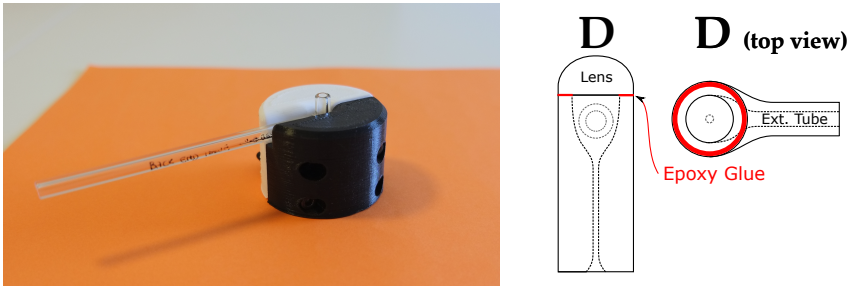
The clamping is provided by four screws and the tool is designed to hold the bolts in place for an easy handling. The polishing film used is the one suggested by Thorlabs for polishing the ceramic fiber connectors: a diamond-dust based polishing film, in different grit size, from 30 down to 0.02  $\mu\text{m}$  grit. Once the cell is clamped, the facet is polished using a finer grit after each polishing cycle. The polishing method is also the same used for the fiber connectors: dropping distilled water on to the sheet and polish the facet in a *figure-eight* motion.
